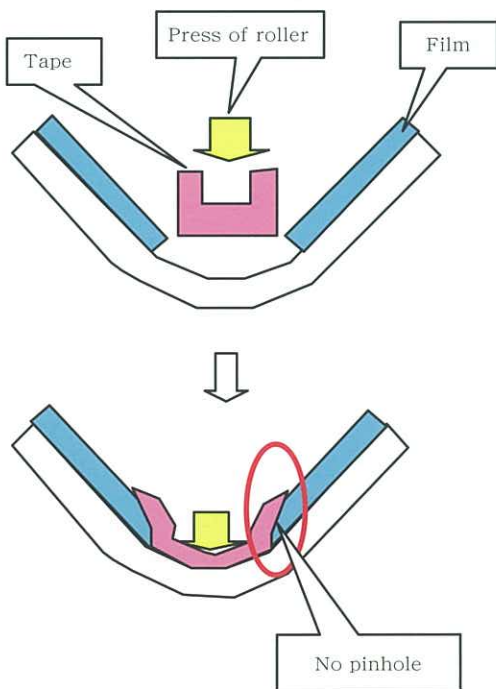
Cross-sectional diagram of laminated section (after improvement)
